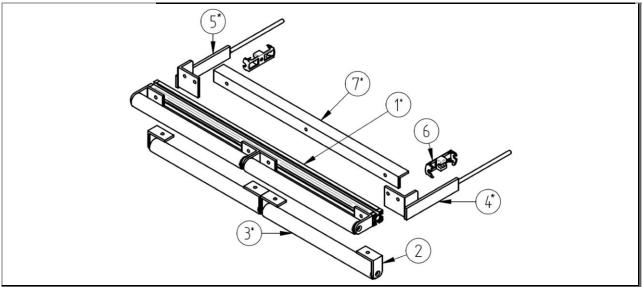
Parts list: Multi-tech rolling knife edge Ø32– ZZ.995.0189.02-2
